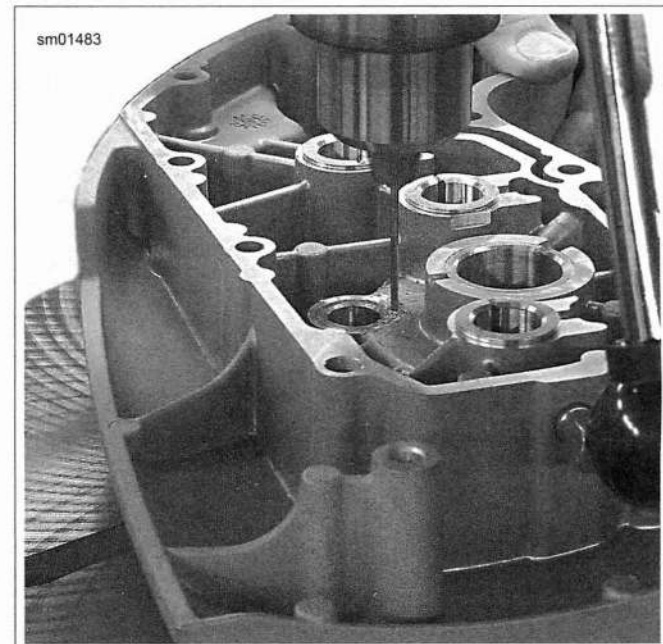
Drilling Pinion Bushing Dowel Pin Hole in Gearcase Cover
